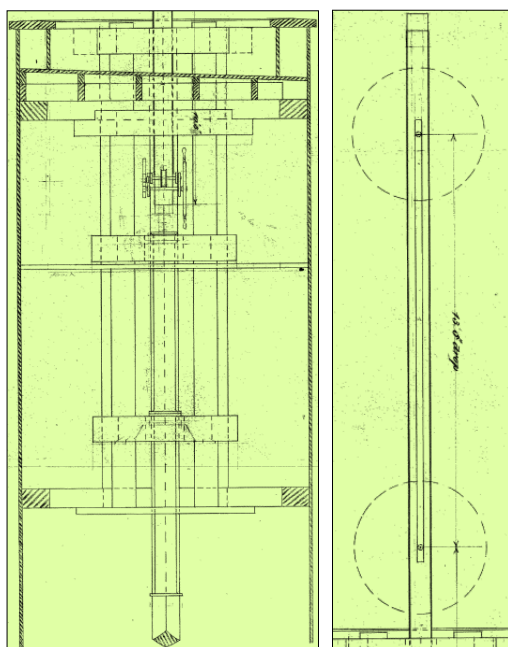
Extracts from 1888 installation drawing for the Wellington time ball apparatus (Wellington Harbour Board archive, Drawing Office No. 3511)
